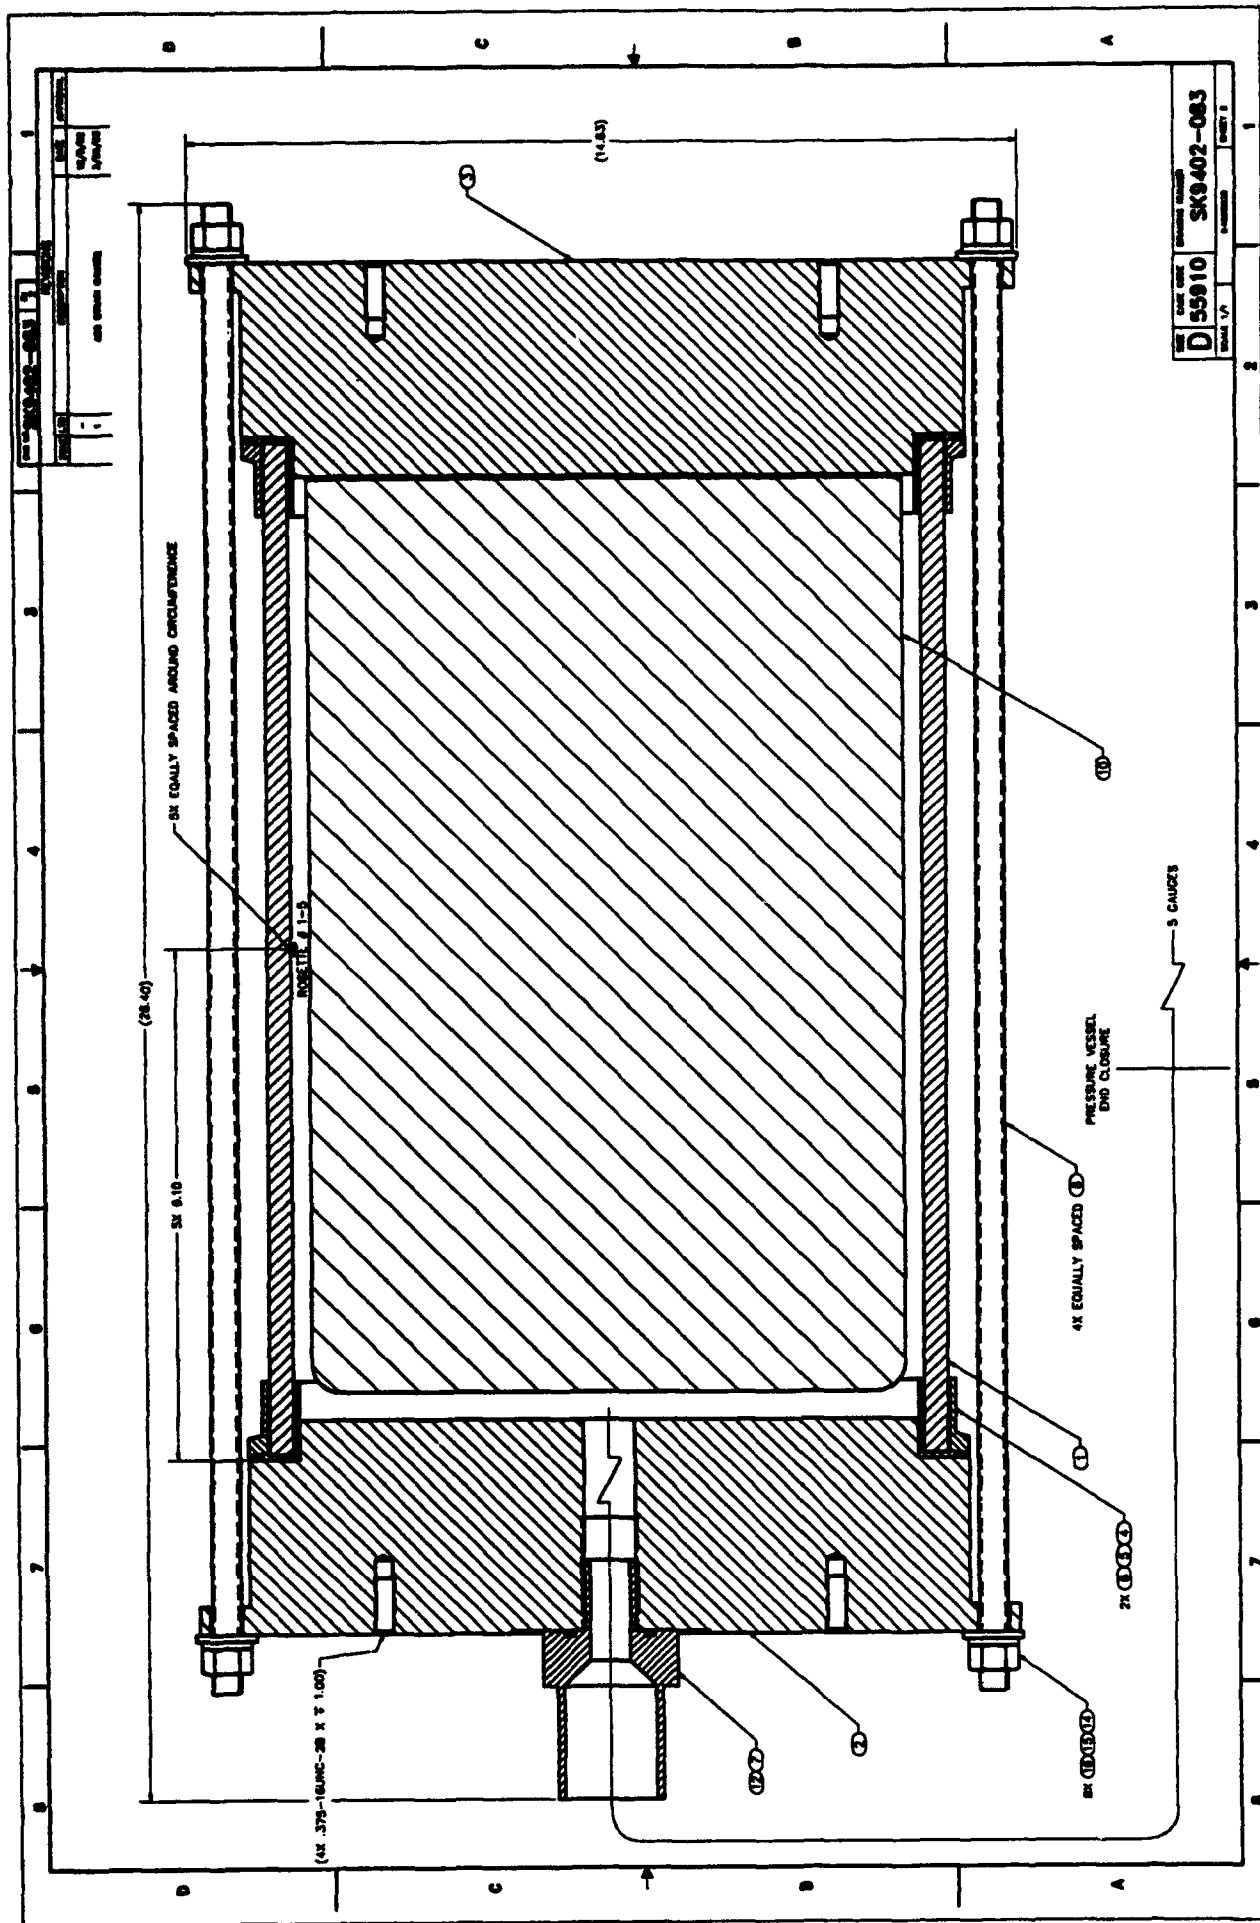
12-inch cylinder test assembly III configuration, Sheet 2.
